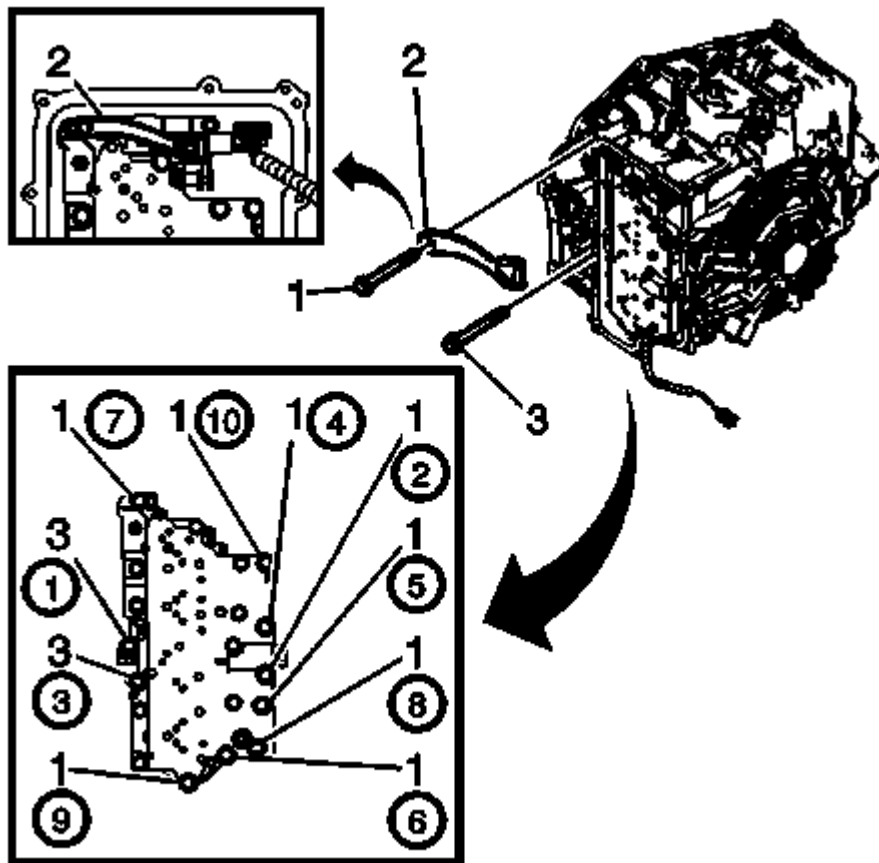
Identifying Control Valve Body Bolts Torque Sequence
